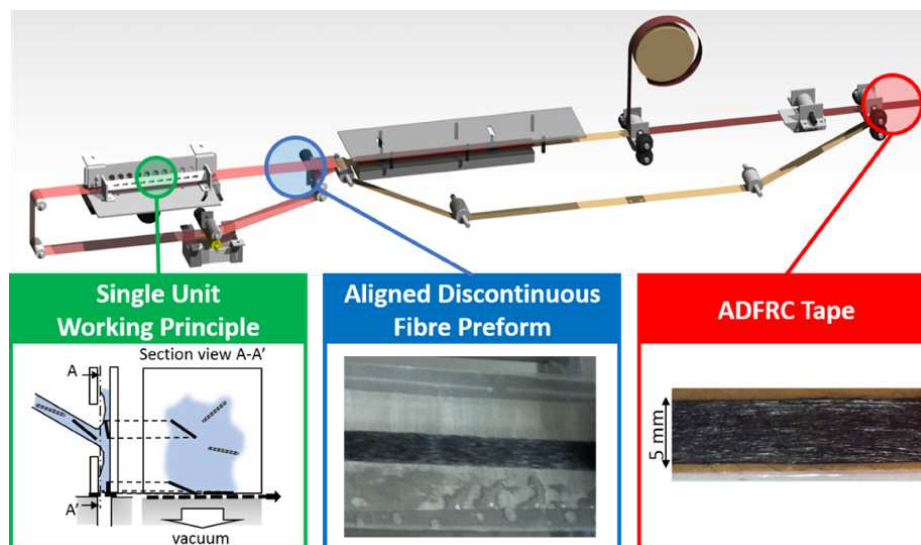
HiPerDiF 2.5 machine. Image reproduced directly from [6].
